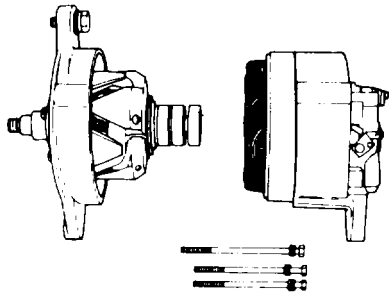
Separating Front Cover with Rotor from Rear Cover
